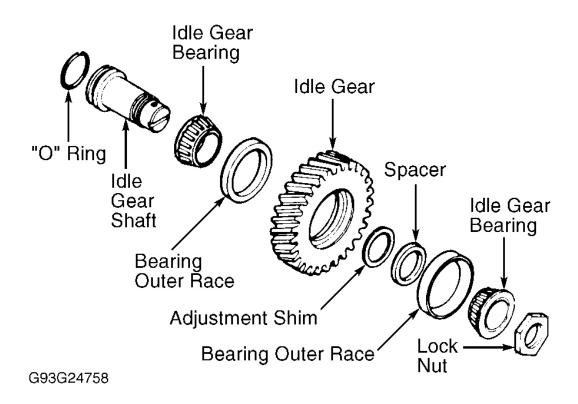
Exploded View Of Idler Gear Assembly Courtesy of MAZDA MOTORS CORP.
